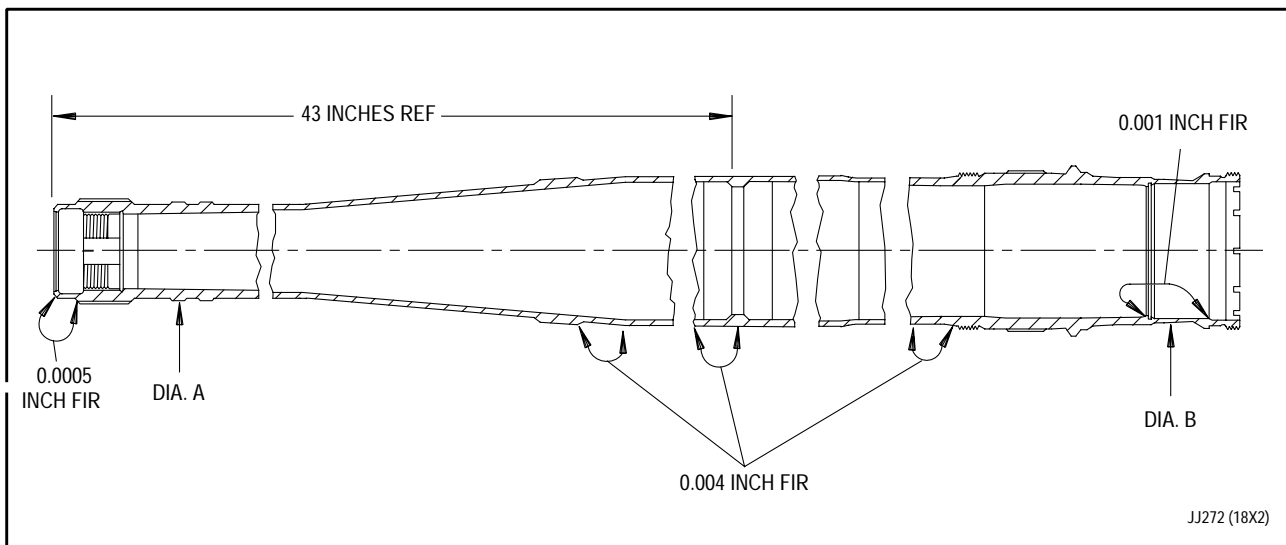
Front Compressor Drive Turbine Shaft Assembly - Circular Runout Check
